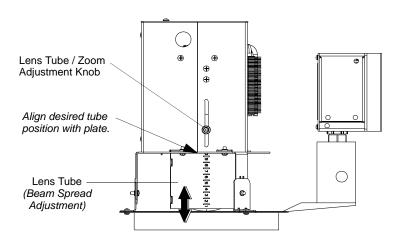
Lens Tube (Beam Spread Adjustment) Setting
